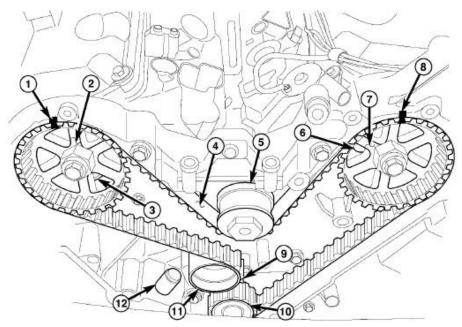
Timing Gear Components Courtesy of CHRYSLER LLC
